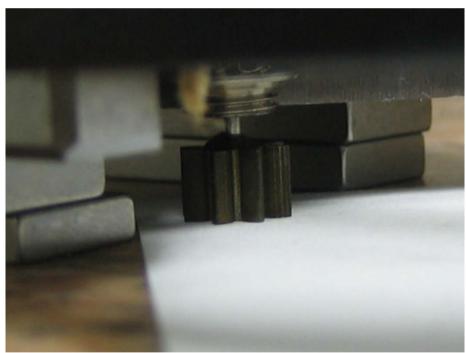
Picture showing the motor shaft inside the pinion while the epoxy was setting.
